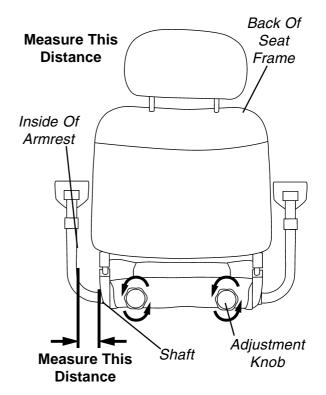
ARMREST WIDTH ADJUSTMENT
